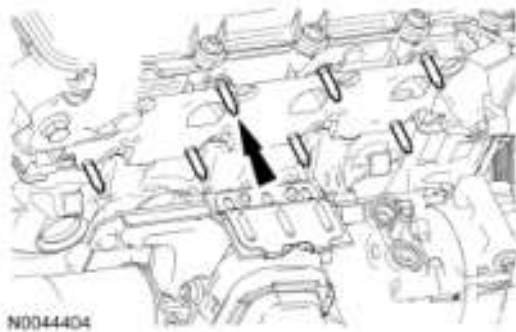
Identifying Special Tool On Cylinder Head
